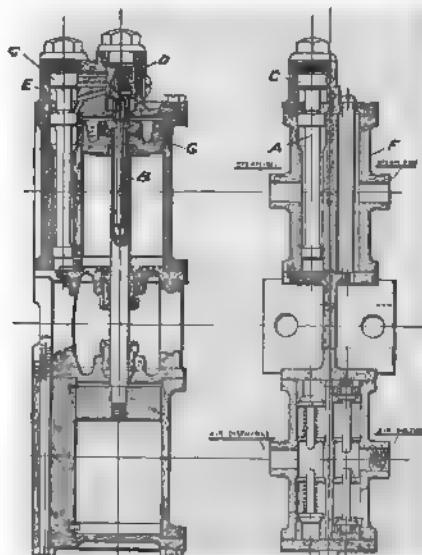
Sectional View of the Valve Motion and Mechanism of the "Victor" Auxiliary Steam Pumps.
